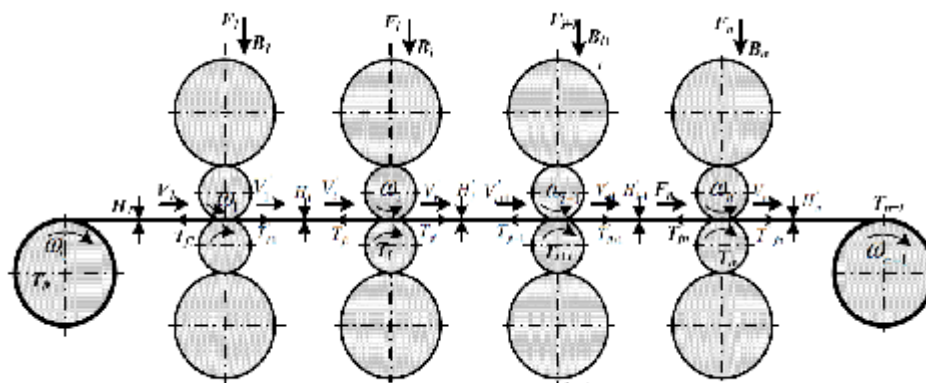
Scheme of multistage tandem strip for continuous cold rolling of sheet metal
